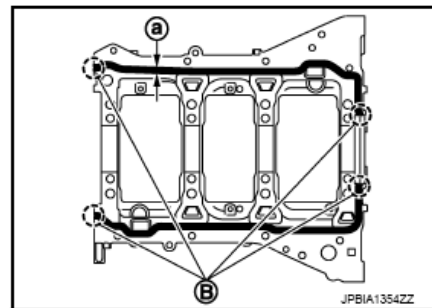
Identifying Liquid Gasket Application Area On Lower Cylinder Block
